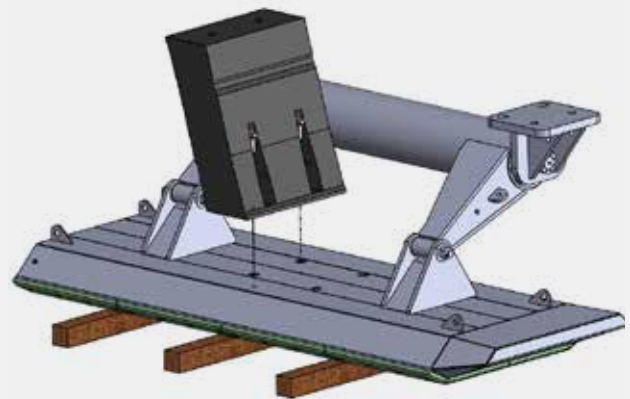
Installing MV/UE fenders on steel panel of the PMF unit
